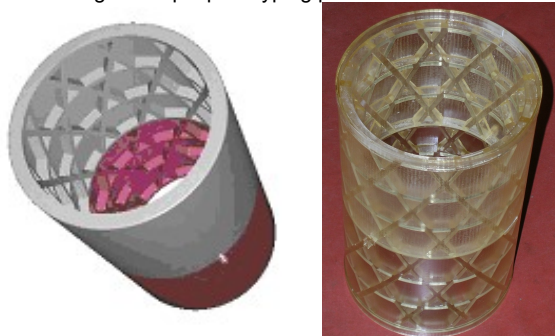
3D - CAD design of the anisogrid lattice cylindrical element and rapid prototyping positive mould
